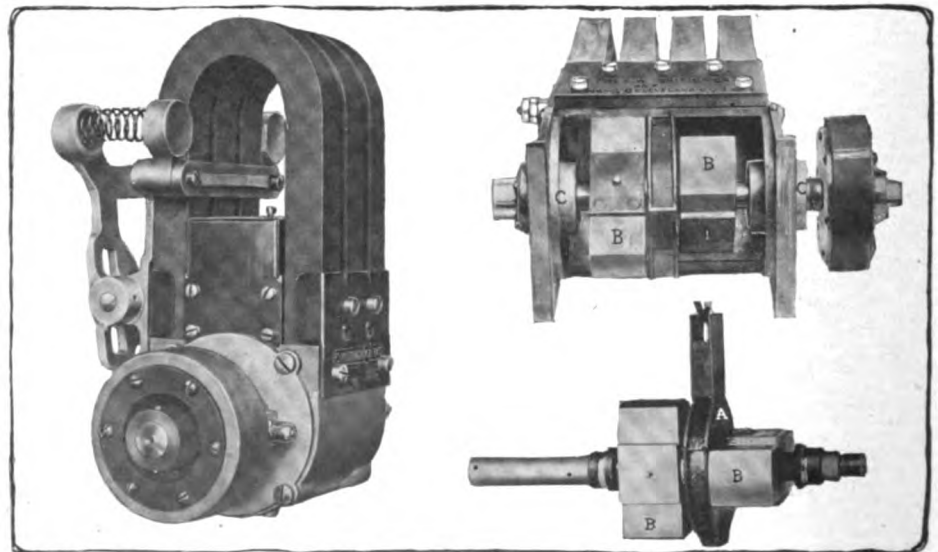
K-W magneto. Fig. 2—Interior of device. Fig. 3—Details of K-W rotor
